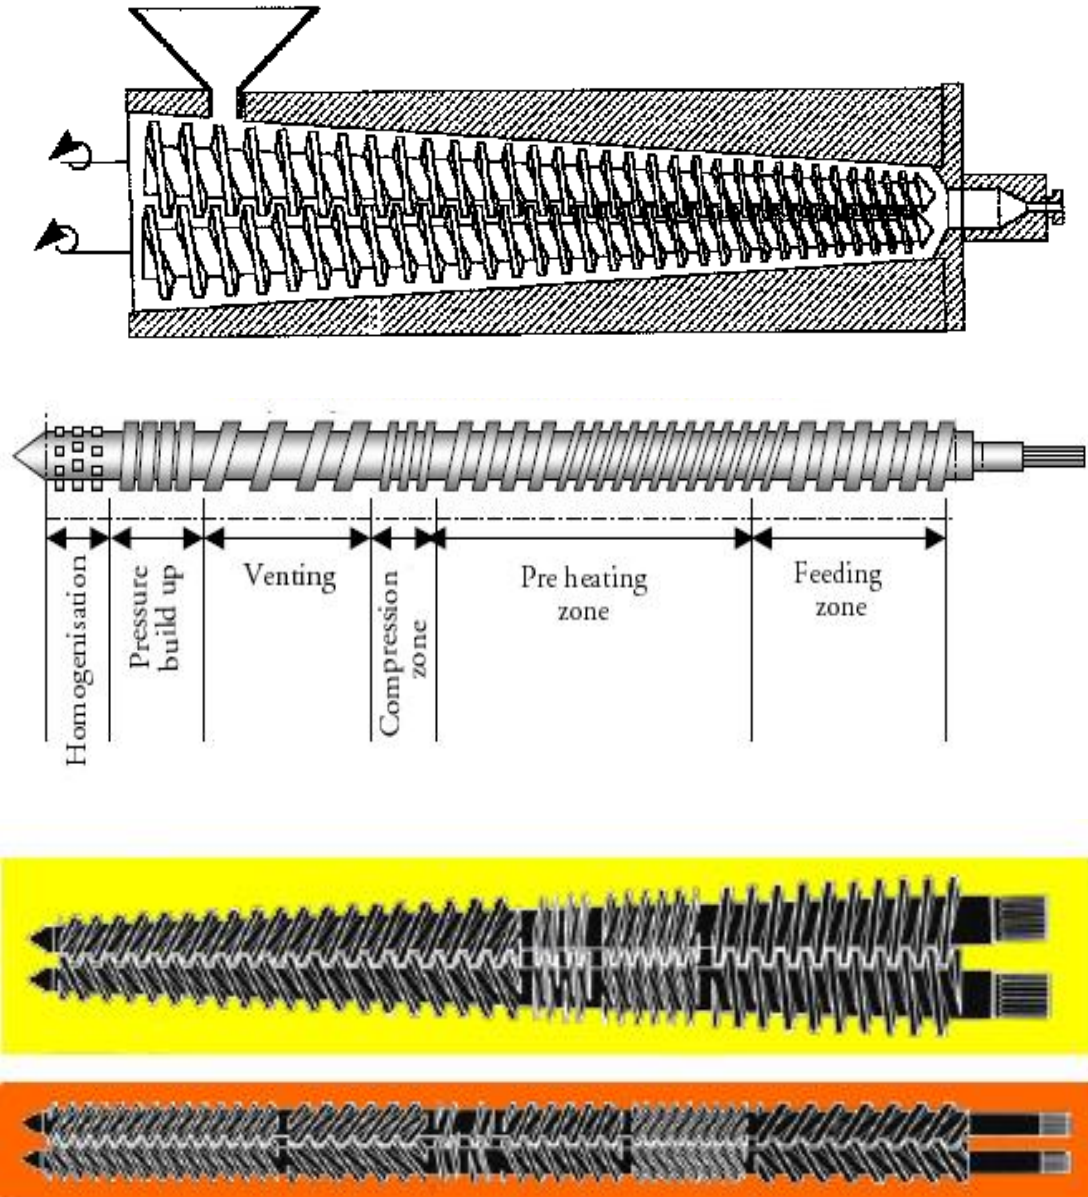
Twin Screw Extruder design (A) Twin screw extruder basic design (B) Twin screw sections (C) Conical and parallel twin screw design
